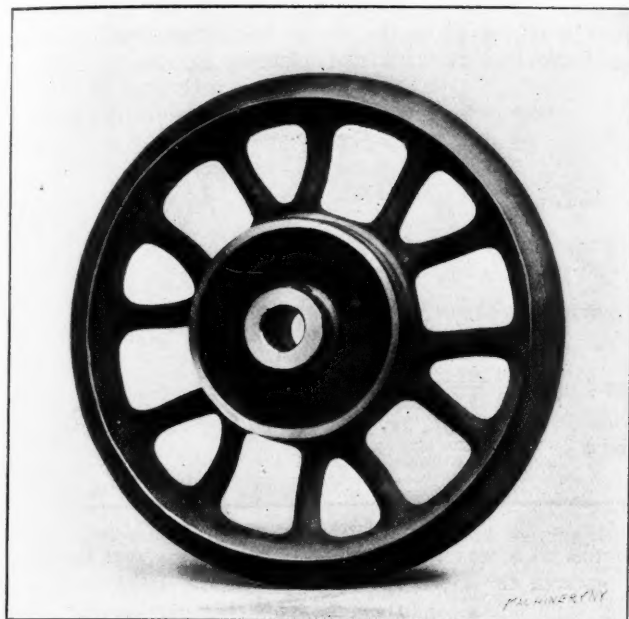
Sewing Machine Handwheel Turned in Cleveland Chucking Machine
